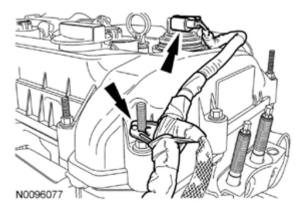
Locating Variable Camshaft Timing (VCT) Electrical Connector Courtesy of FORD MOTOR CO.
